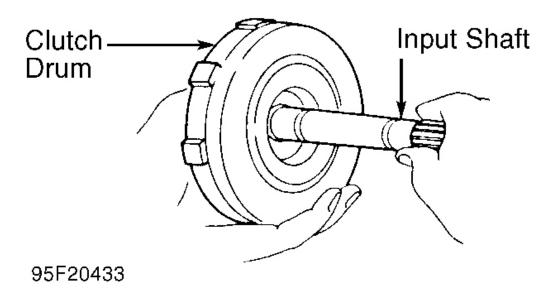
Checking One-Way Clutch Operation Courtesy of ISUZU MOTOR CO.
